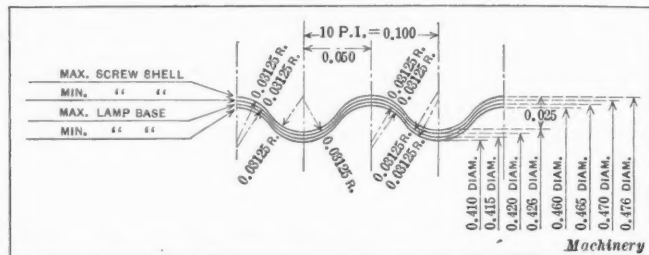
Candelabra Size Lamp-base and Socket Thread
